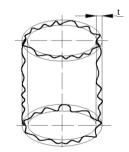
Form tolerance - cylindricity, t - tolerance.
